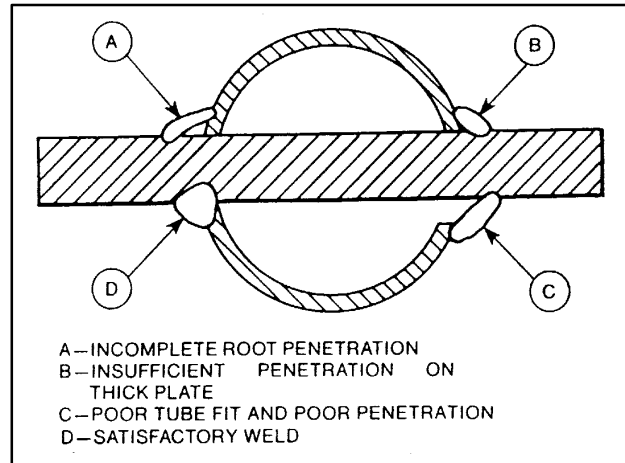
Common defects to avoid when fitting and welding aircraft certification cluster.
